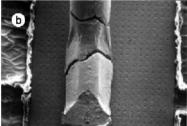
Two examples of bond wire heel cracking [4, fig 7.]
